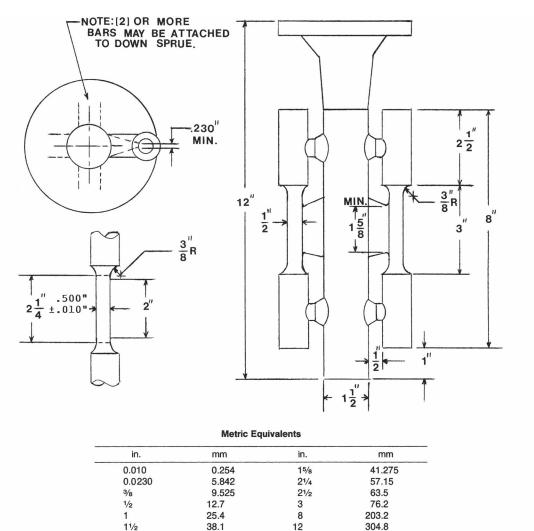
TEST BLOCK FOR TENSION TEST SPECIMEN
